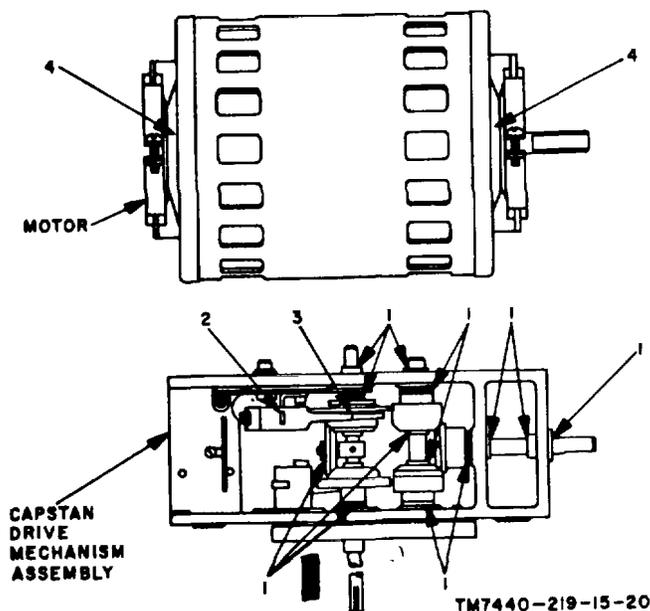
Capstan drive mechanism and motor lubrication points.
